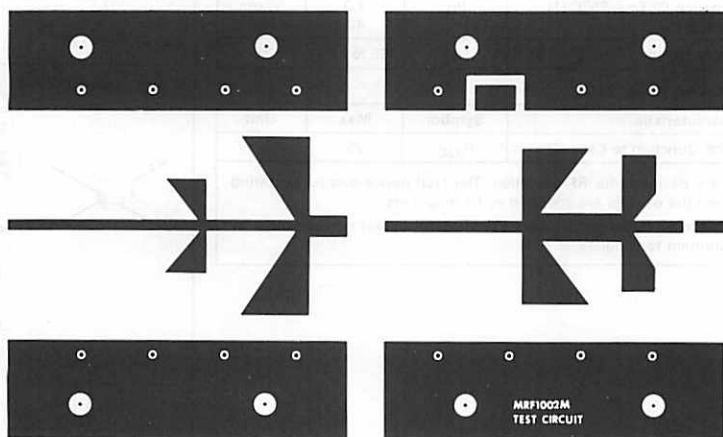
PRINTED CIRCUIT BOARD LAYOUT - 1090 MHz TEST CIRCUIT
